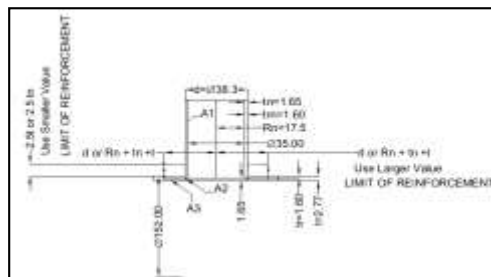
limits of reinforcement for opening in cylindrical shell [6]
